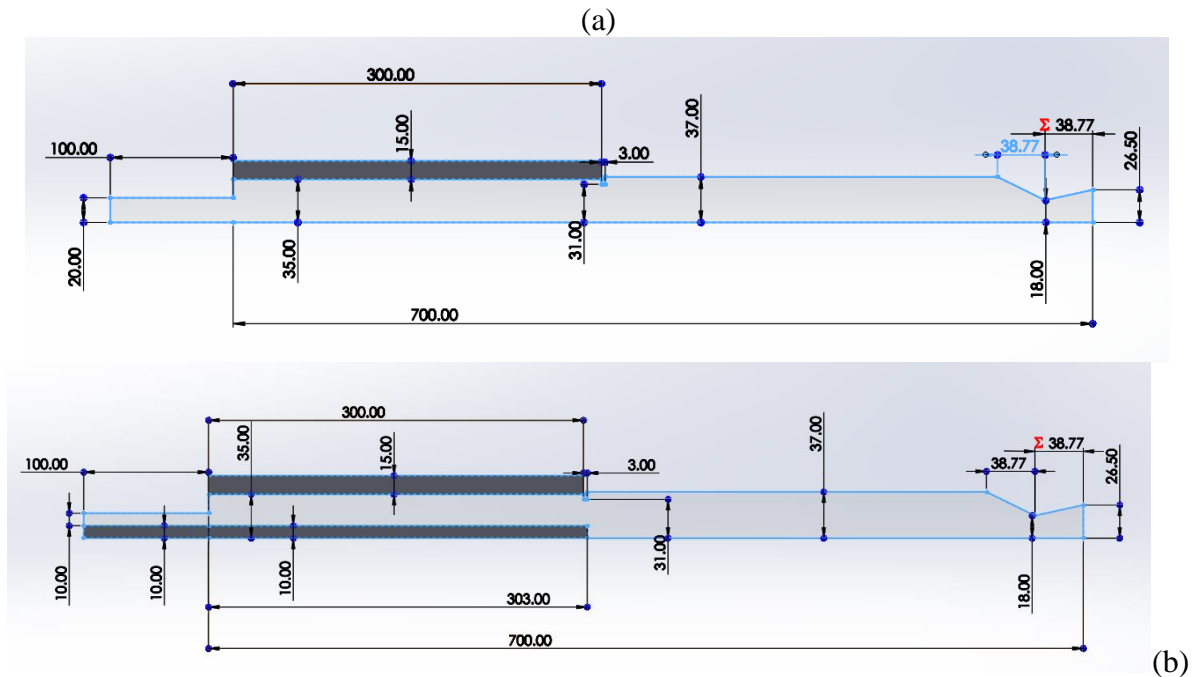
Combustion chamber geometry and dimensions (a) classic and (b) with rod, solid fuel ramjet engine.
